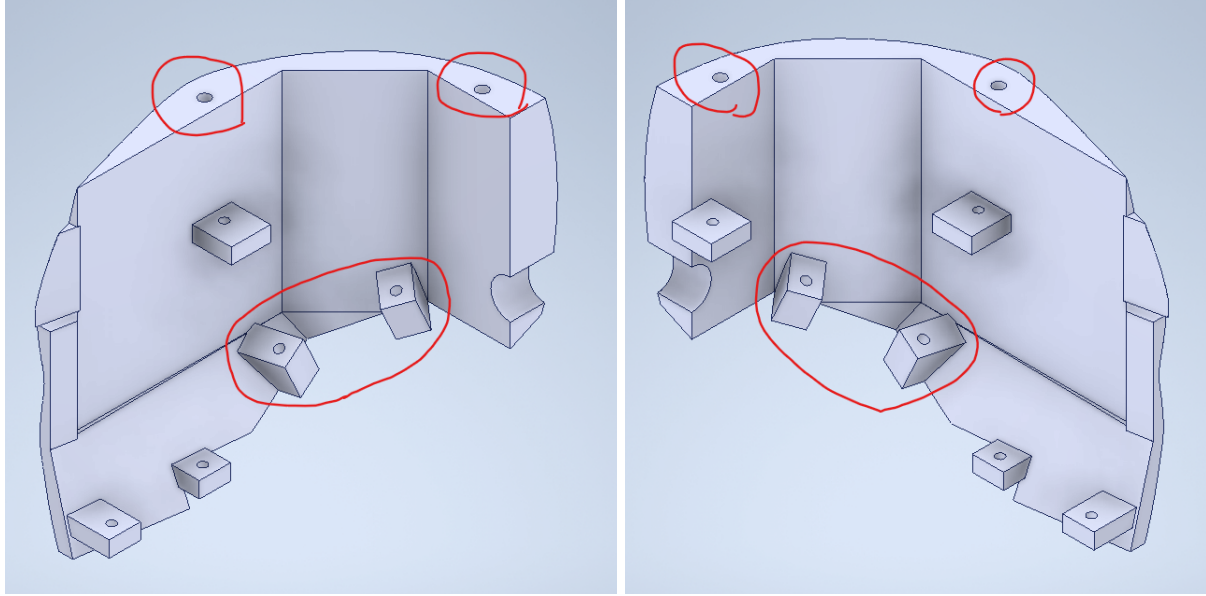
Two halves to the side-head lattice showcasing the removed or non-utilized connectors circled in red
